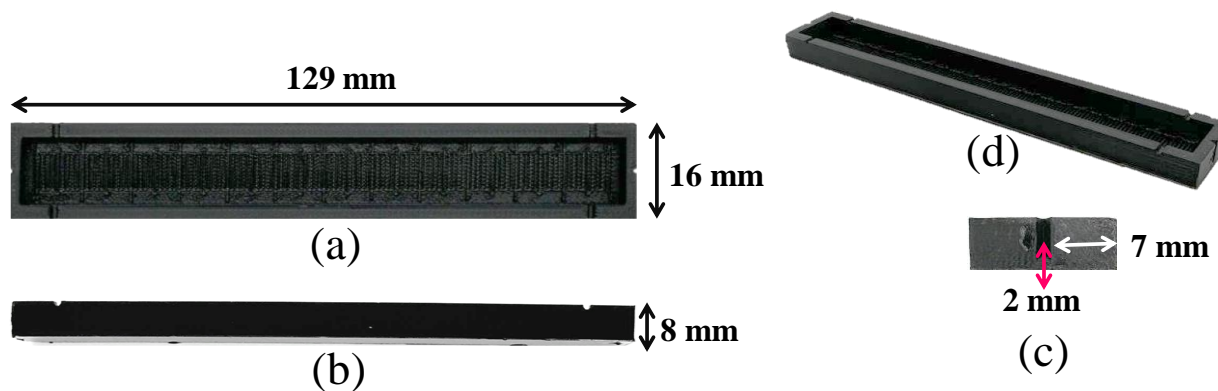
Dimensions of the fabricated platform, (a) top view, (b) front view, (c) right-side view, and (d) perspective view.
